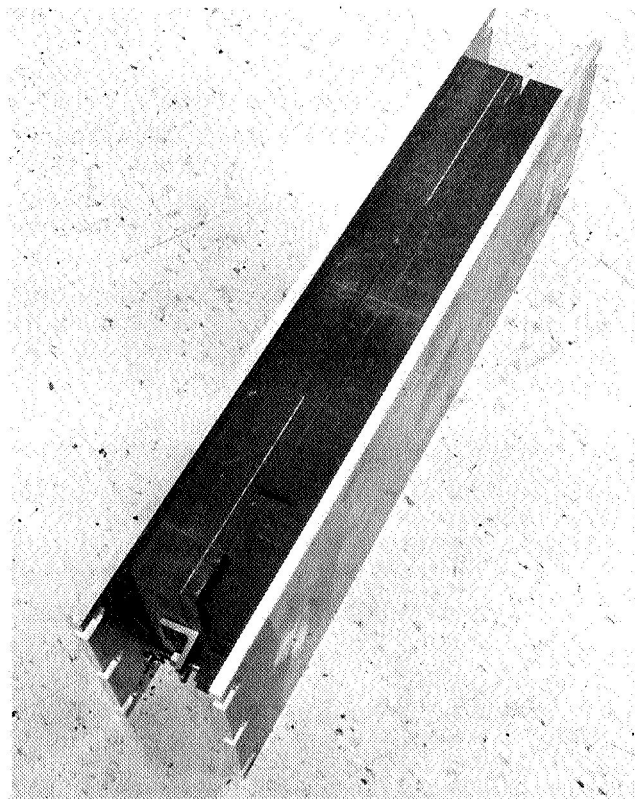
S-IVB Subsize Panel Forming Tool (Assembled)
